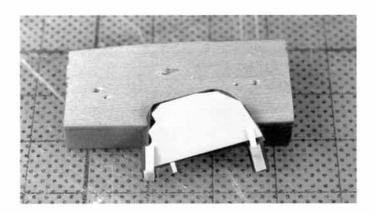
The photoetched console's backing has a .01-inch-thick piece of sheet plastic, which serves to highlight the instrument details and strengthen the photoetch. Also note the additional strips of plastic which reinforce the photoetched switch plates.
